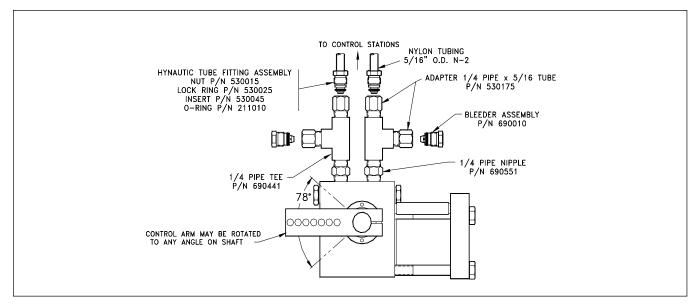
ST-06 Integrated Throttle Slave with Tee and Bleeder Valve Installation
